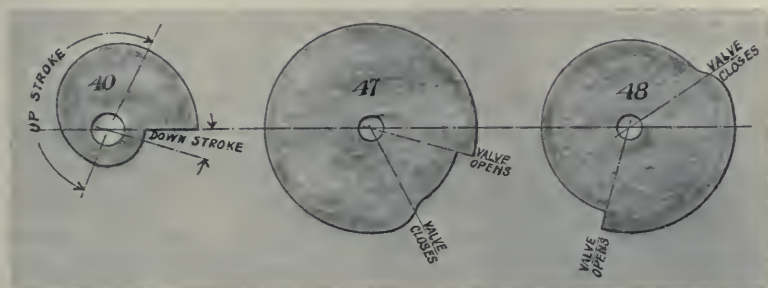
Driving cam (40); outlet valve cam (47); inlet valve cam (48) ($\times \frac{1}{3}$).
